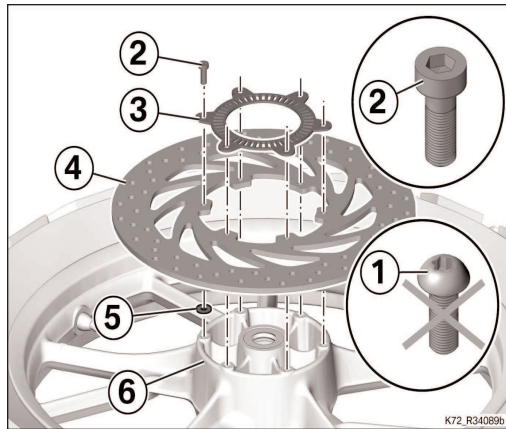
Threaded fasteners, front brake disc, F 650 GS
